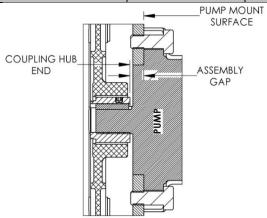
DELTA HUB ASSEMBLY GAP
